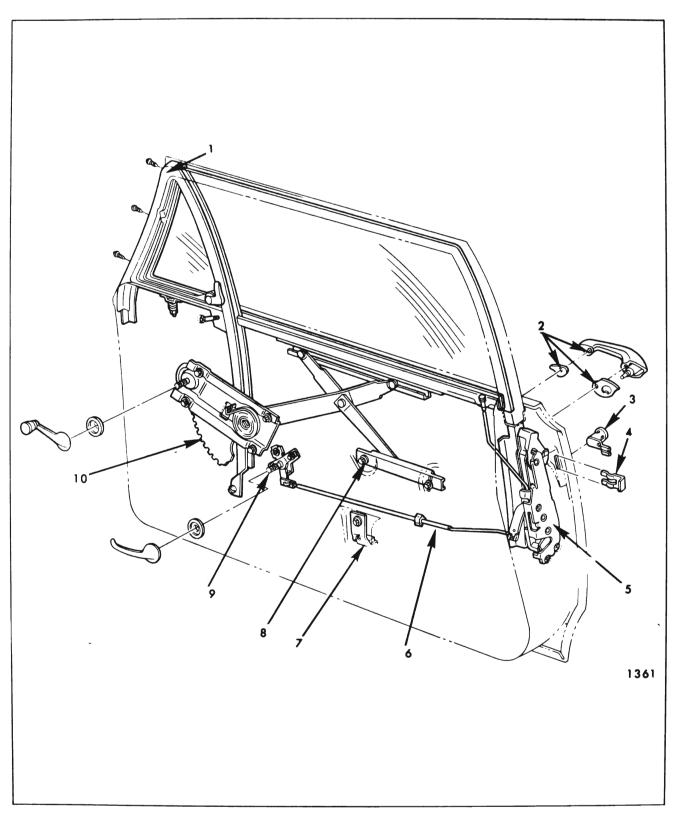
Front Door Hardware - "A" Closed Styles, "X" Similar
